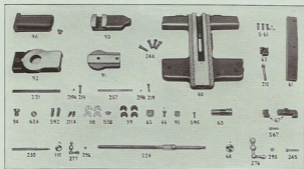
Saddle and Compound Rest Parts for Series "S" Lathes.
